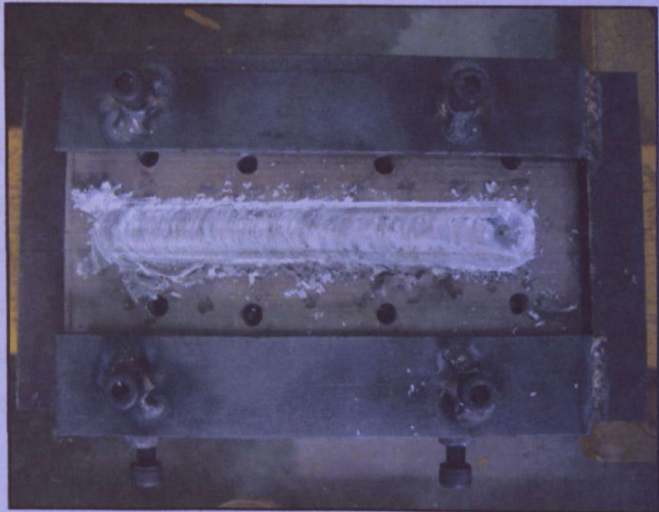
Friction stir welding on Aluminum alloy 6092 SiC 25p T6 metal matrix composite [8]
